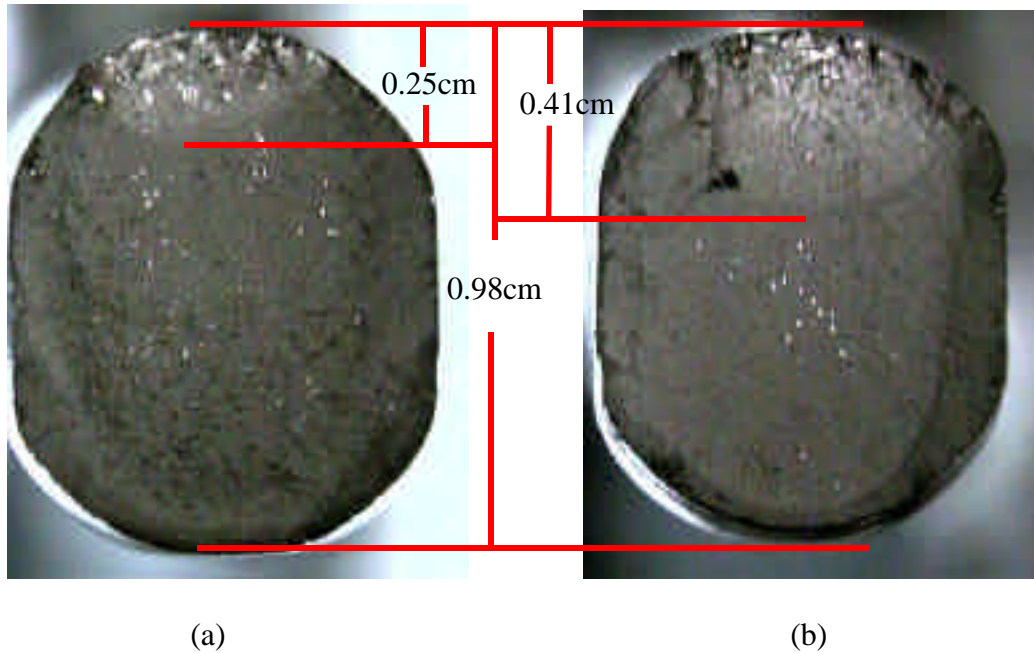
Carabiner fracture surfaces for 12kN (a) and 8kN (b) load cycles. Magnification = 5x.
